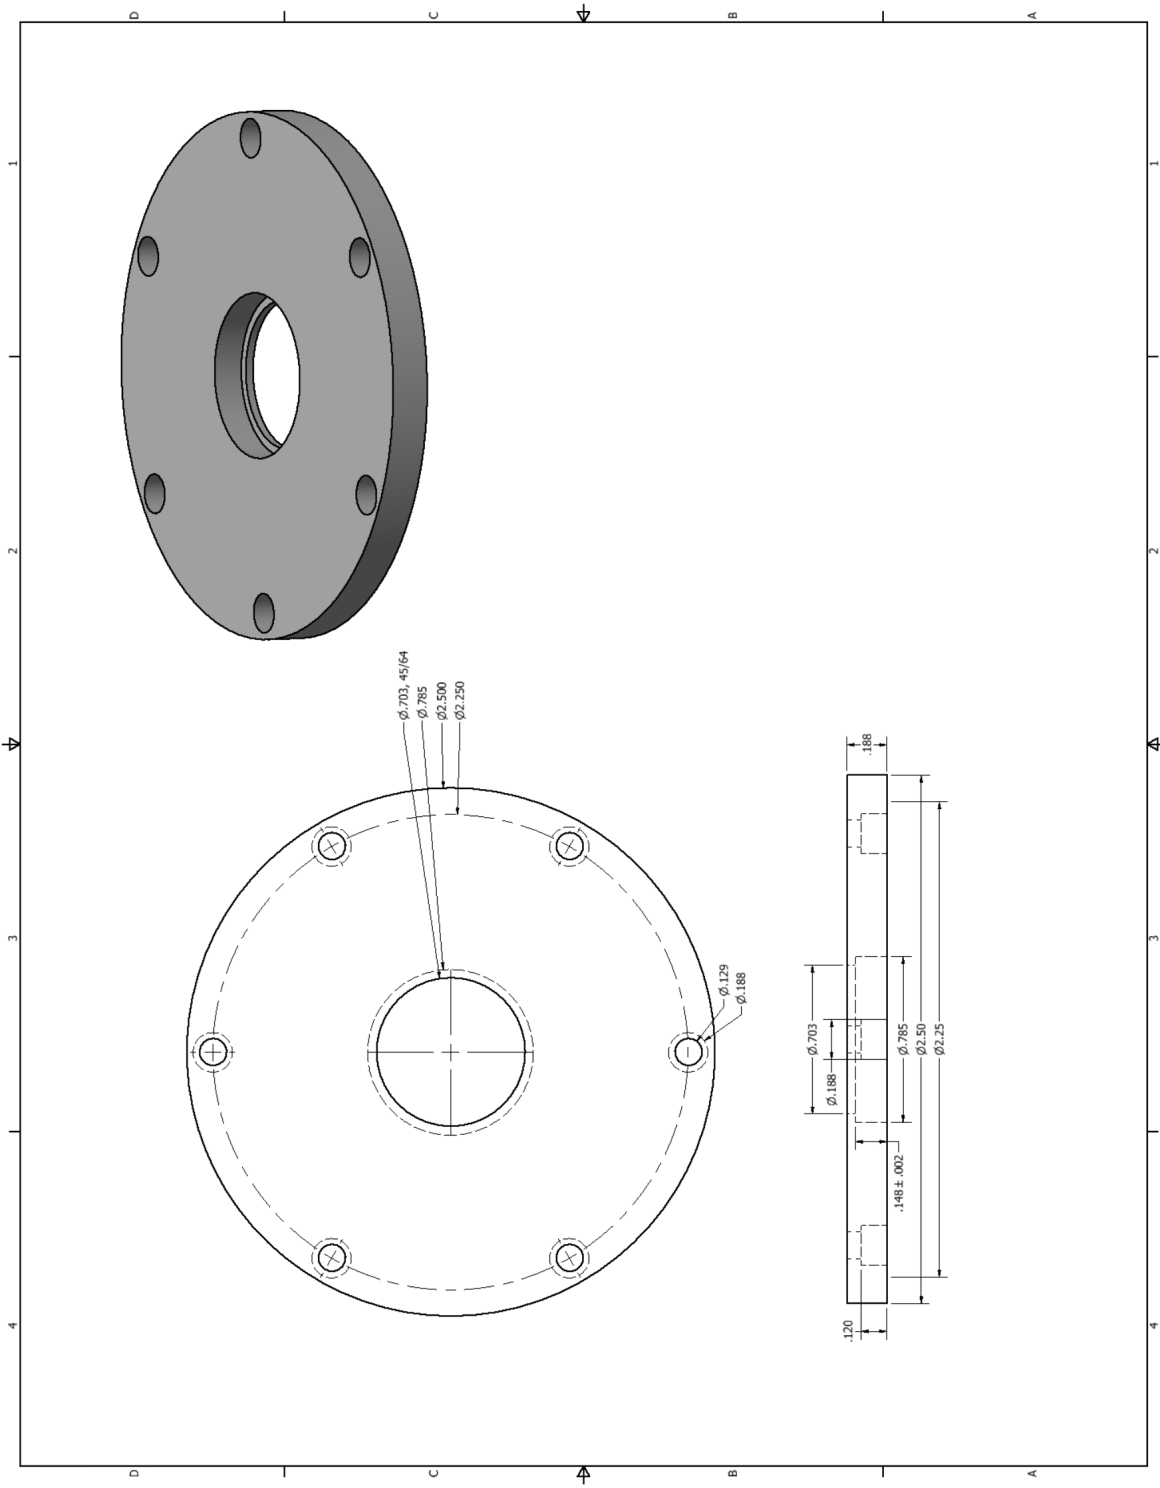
Engineering drawing: Valve end before welding the extension (figure B.5) and making the modification (figure B.6)
